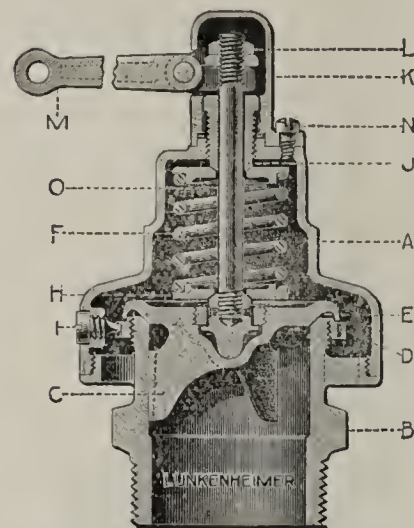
"Alert" Pop Safety Valve for Steam Heating Boilers.
